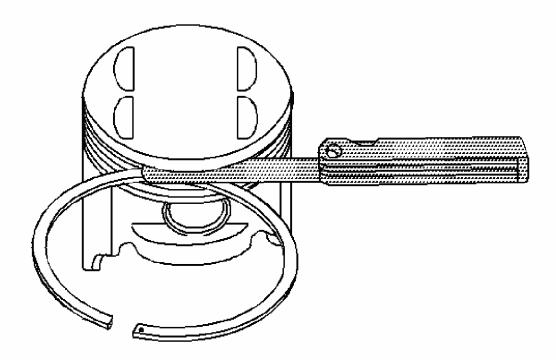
Checking Piston Ring Side Clearance Courtesy of GENERAL MOTORS CORP.
